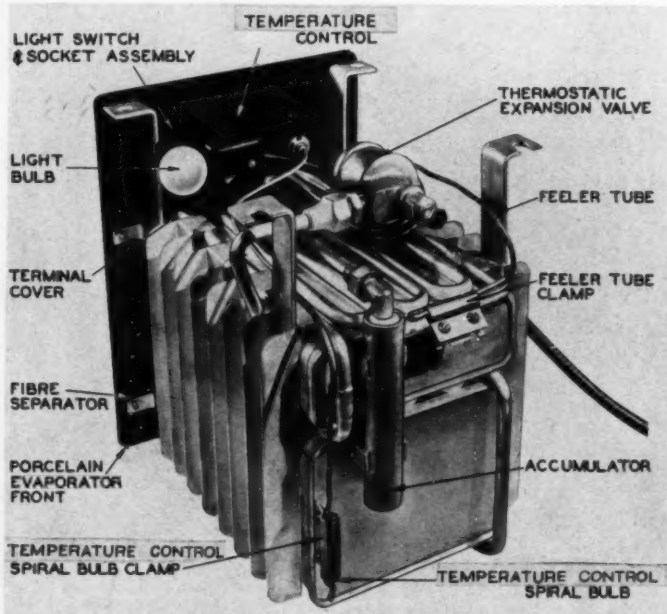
VIEW OF THE EVAPORATOR, FAIRBANKS-MORSE REFRIGERATOR
